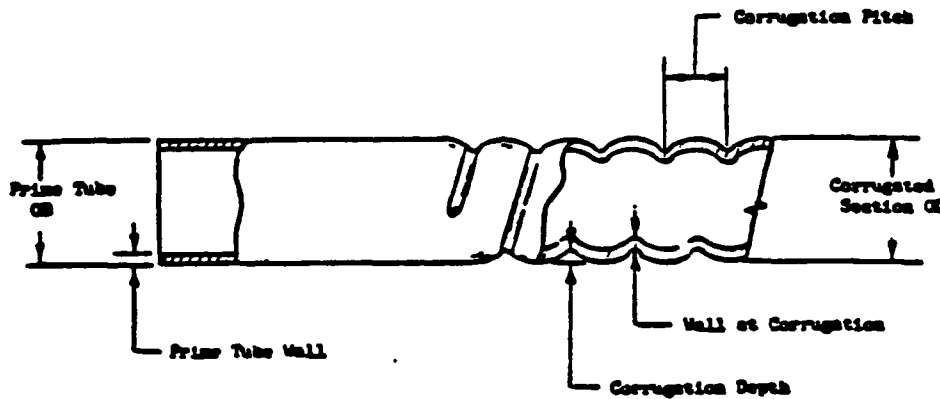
Wolverine Korodense Tube (Courtesy [Ref. 21])
